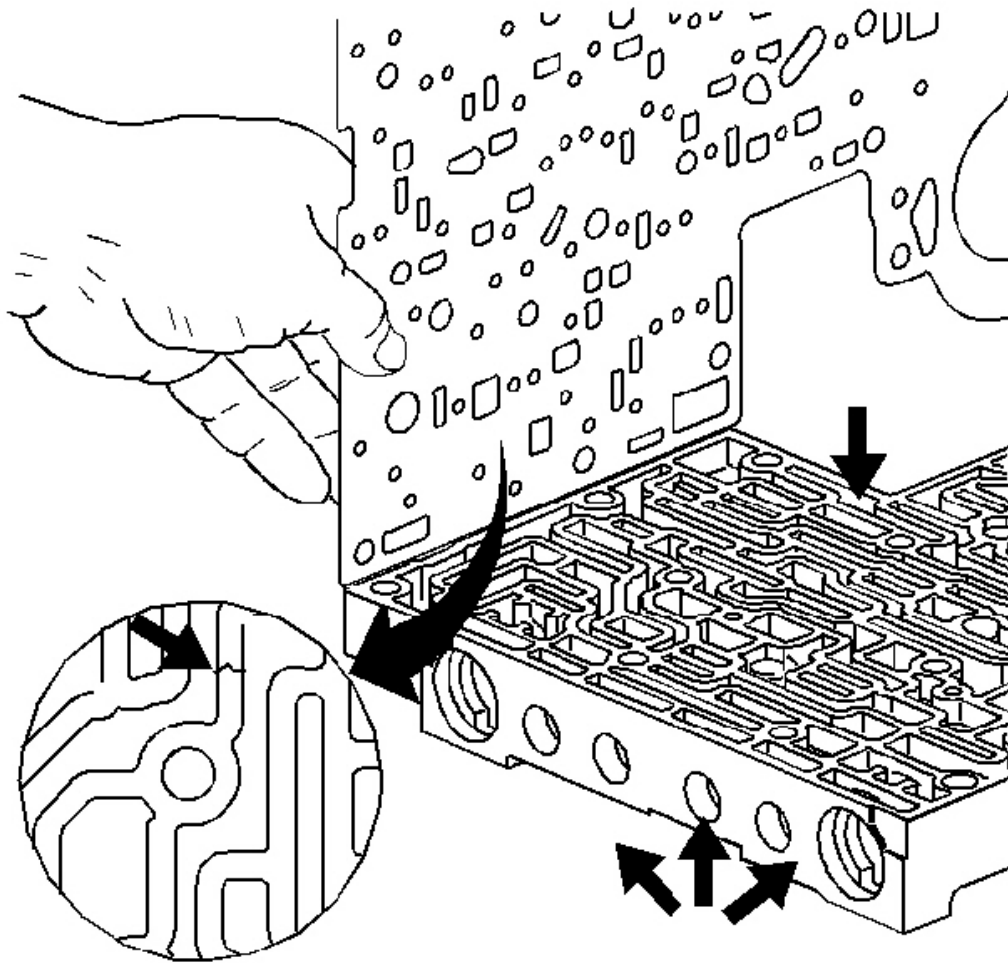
Inspecting Control Valve Body For Channel Witness Marks
